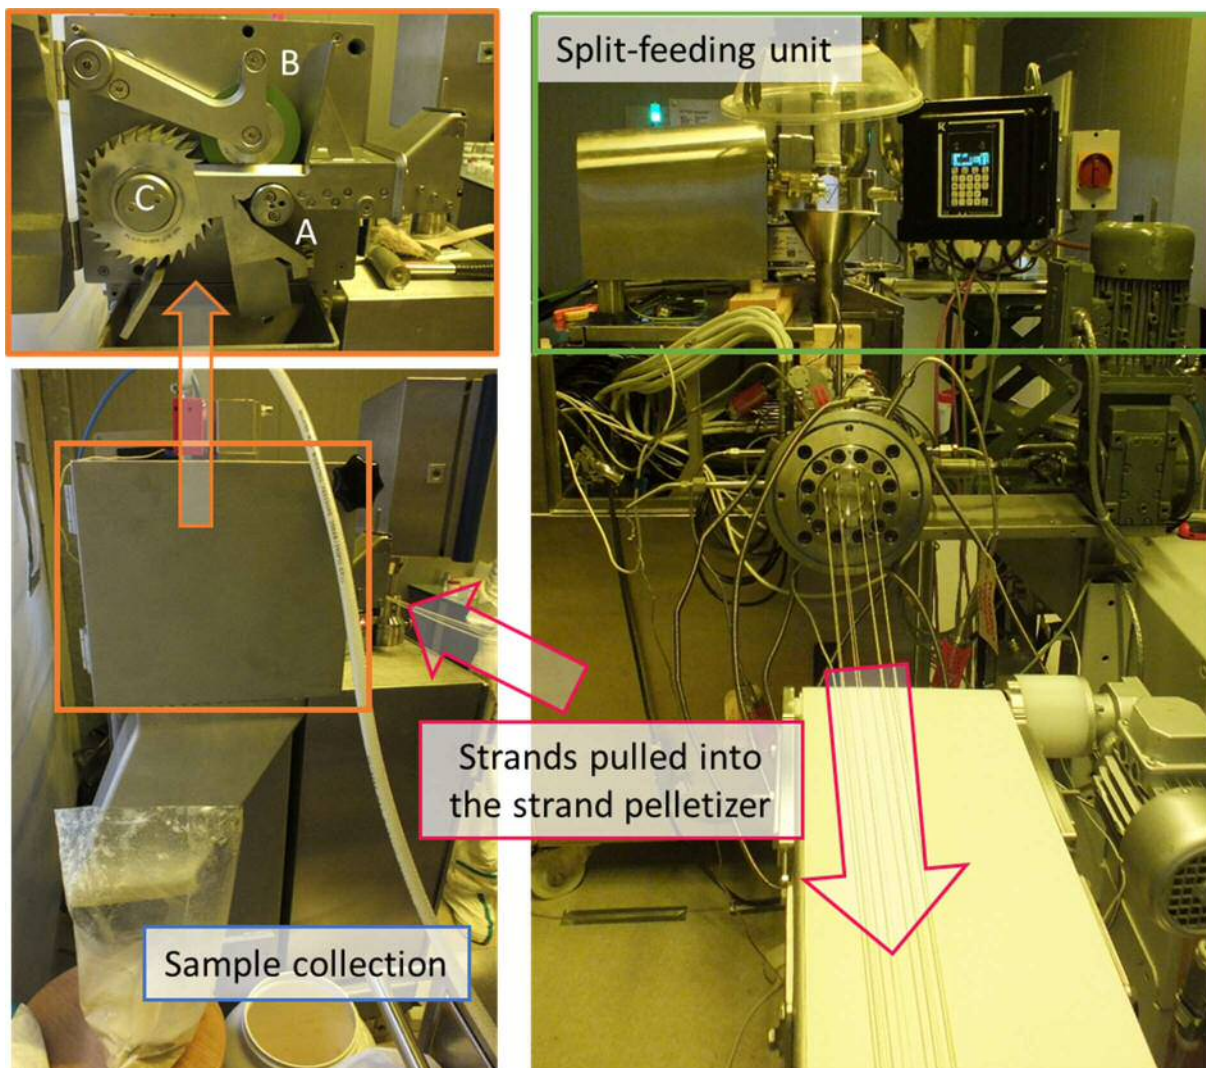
Process setup with split-feeding unit, extruder and strand pelletizer (top-left: opened view with driven (A) and passive (B) intake wheel and knife roll (C)).
